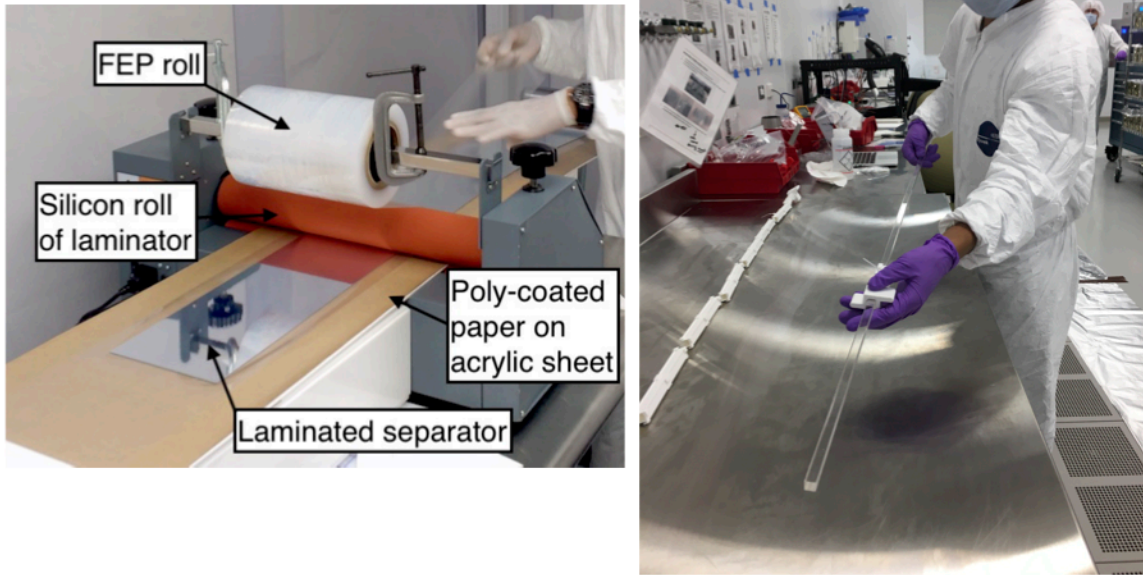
(left) Photograph of lamination setup, showing the FEP film being laminated to one side of the optical separator [122]. (right) Stringing support rods onto an acrylic dowel in preparation for the detector assembly. Note this support rod assembly does not support calibration access in the detector.
